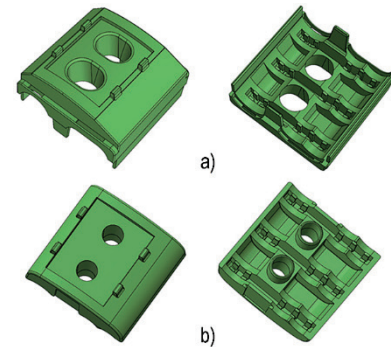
Branching terminal block housing: a) upper part, b) lower part [6]
